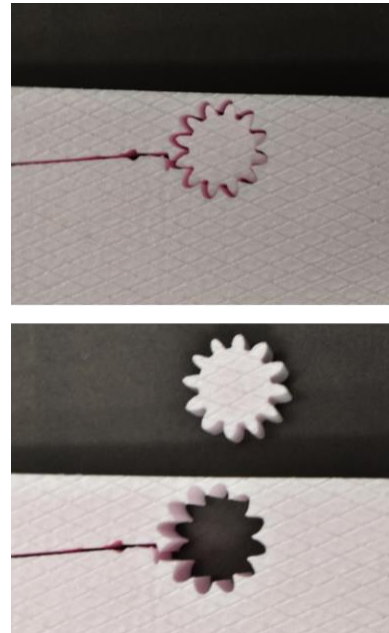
Gear made on a complex multi-axis machine MOMA-W
